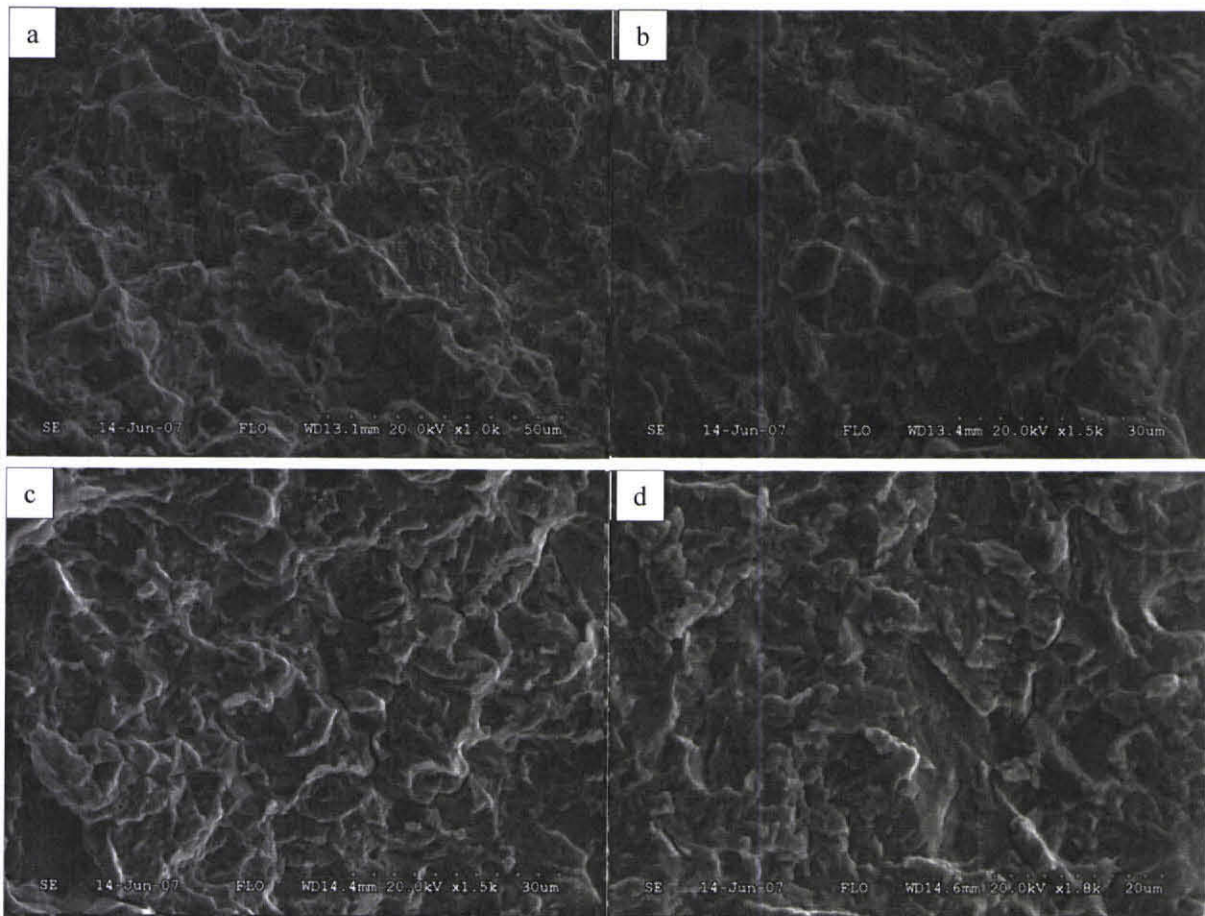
Representative pictures from fracture surface Bolt 3.
